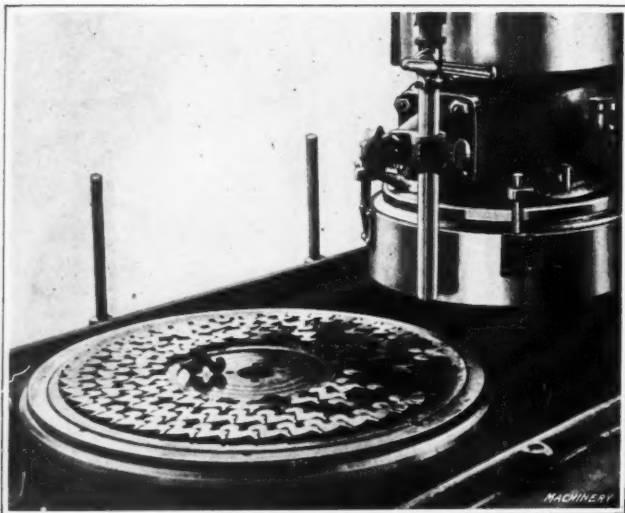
Method of holding and grinding Rifle Hammer shown at A in Fig. 18, on a Blanchard Vertical Surface Grinder
